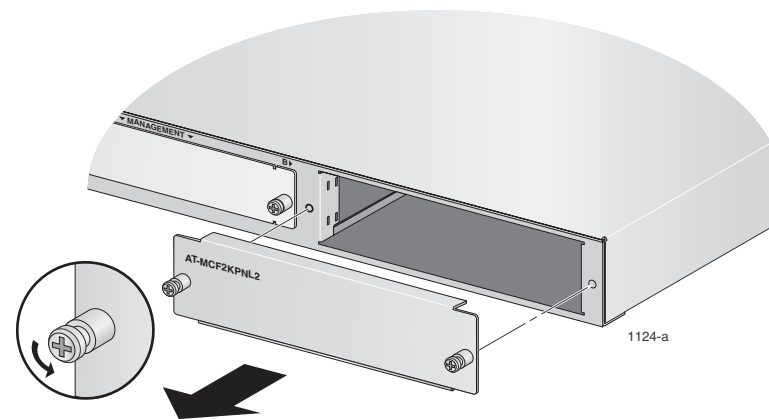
Removing the Blank Panel from a Power Supply/Fan Module Slot
